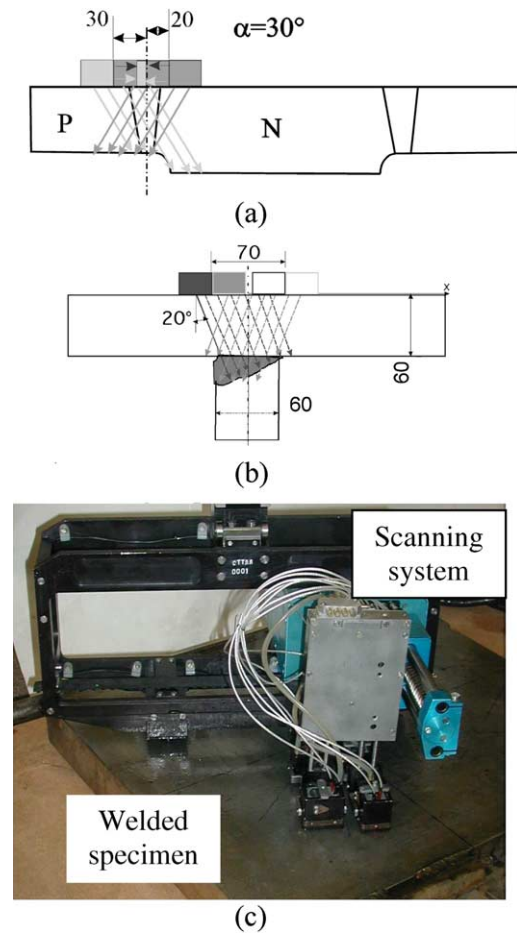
UT inspection tests on welded 60 mm plates. (a) Welding for flexible support housing. (b) Welding for poloidal rib to inner shell. (c) UT inspection system during testing (RFPT).
